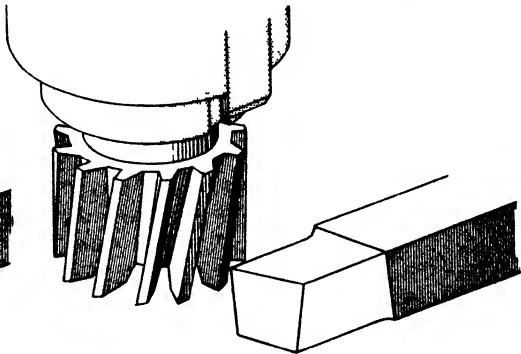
Milling the Side Rake Angle on a Tool by Means of a Shell-End Face Mill
